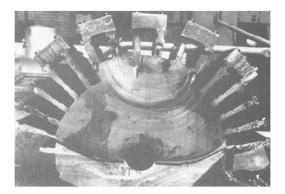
Fretting fatigue failure example of turbogenerator rotor. After Lindley and Nix (1991) [14].
